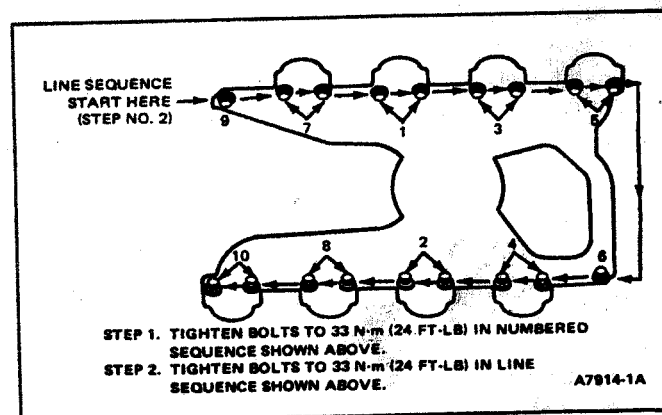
Intake Manifold Attaching Bolts Tightening Sequence
